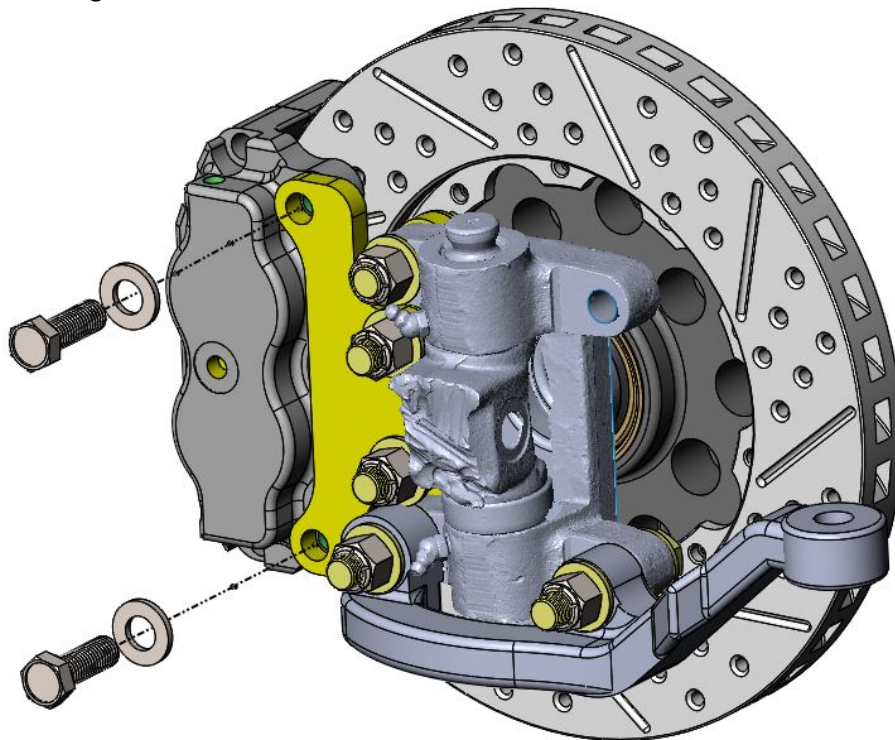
Caliper Bolt Installation (Passenger Side Shown)
